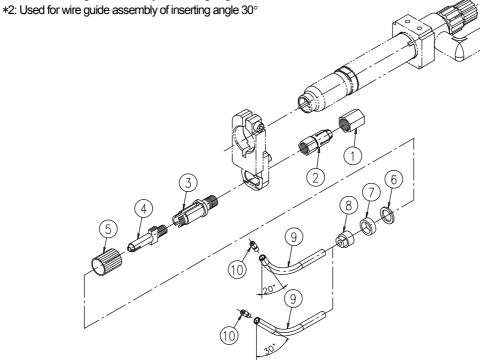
Wire Guide Assembly (1)  $\sim$  (12) Parts List (Fe • SUS)
